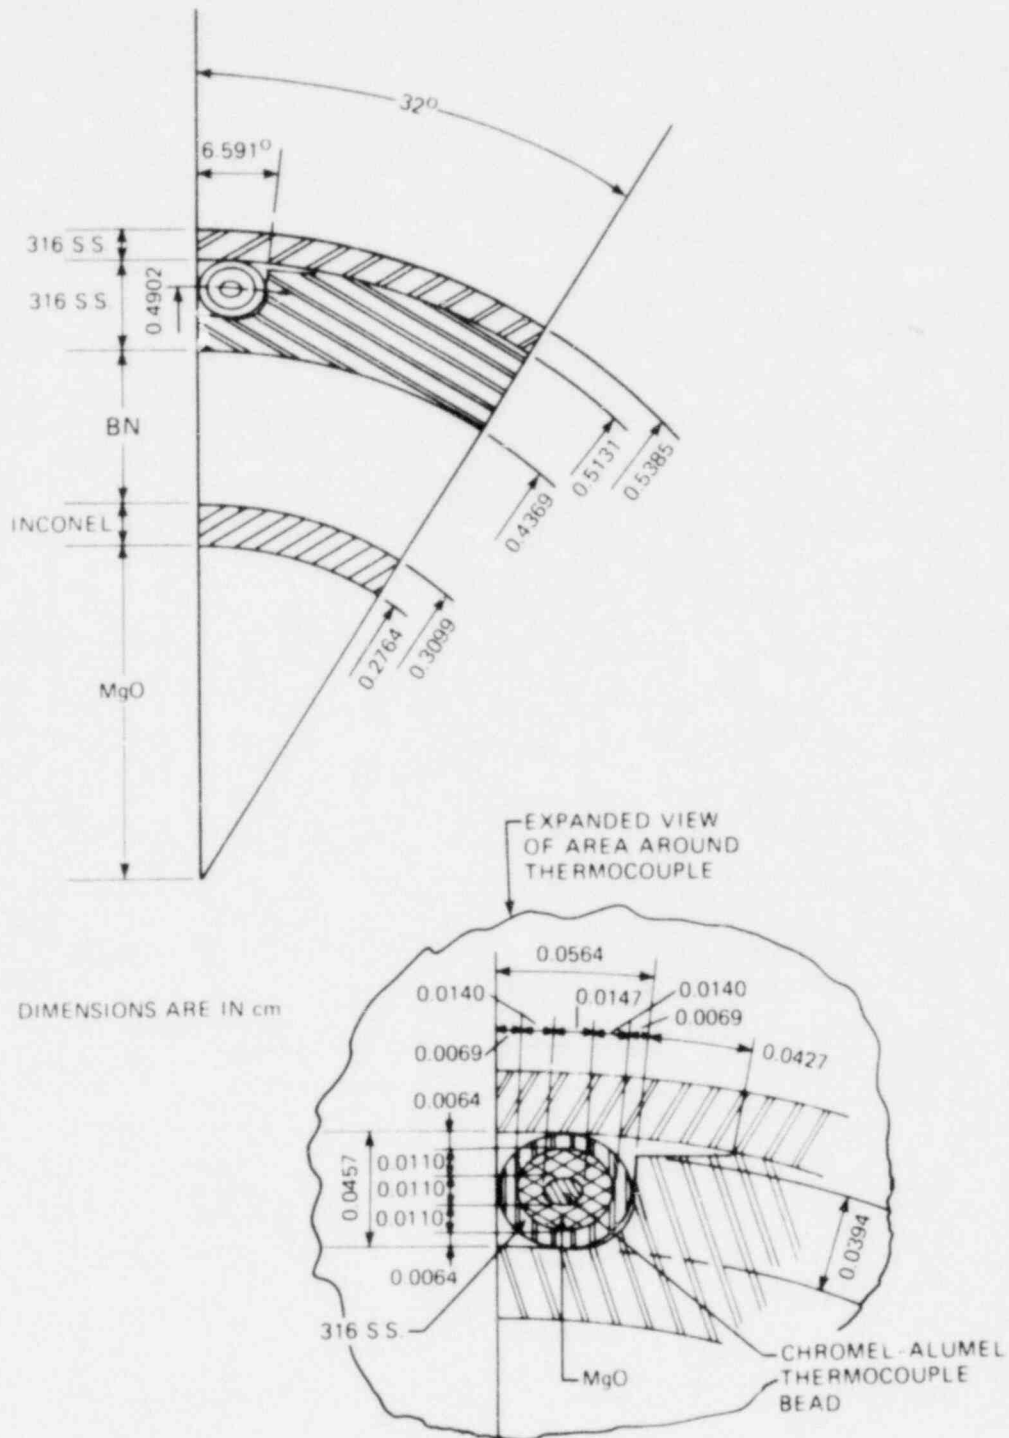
Segment of heater showing mean dimensions in the thermocouple area (1 in. = 2.54 cm).
